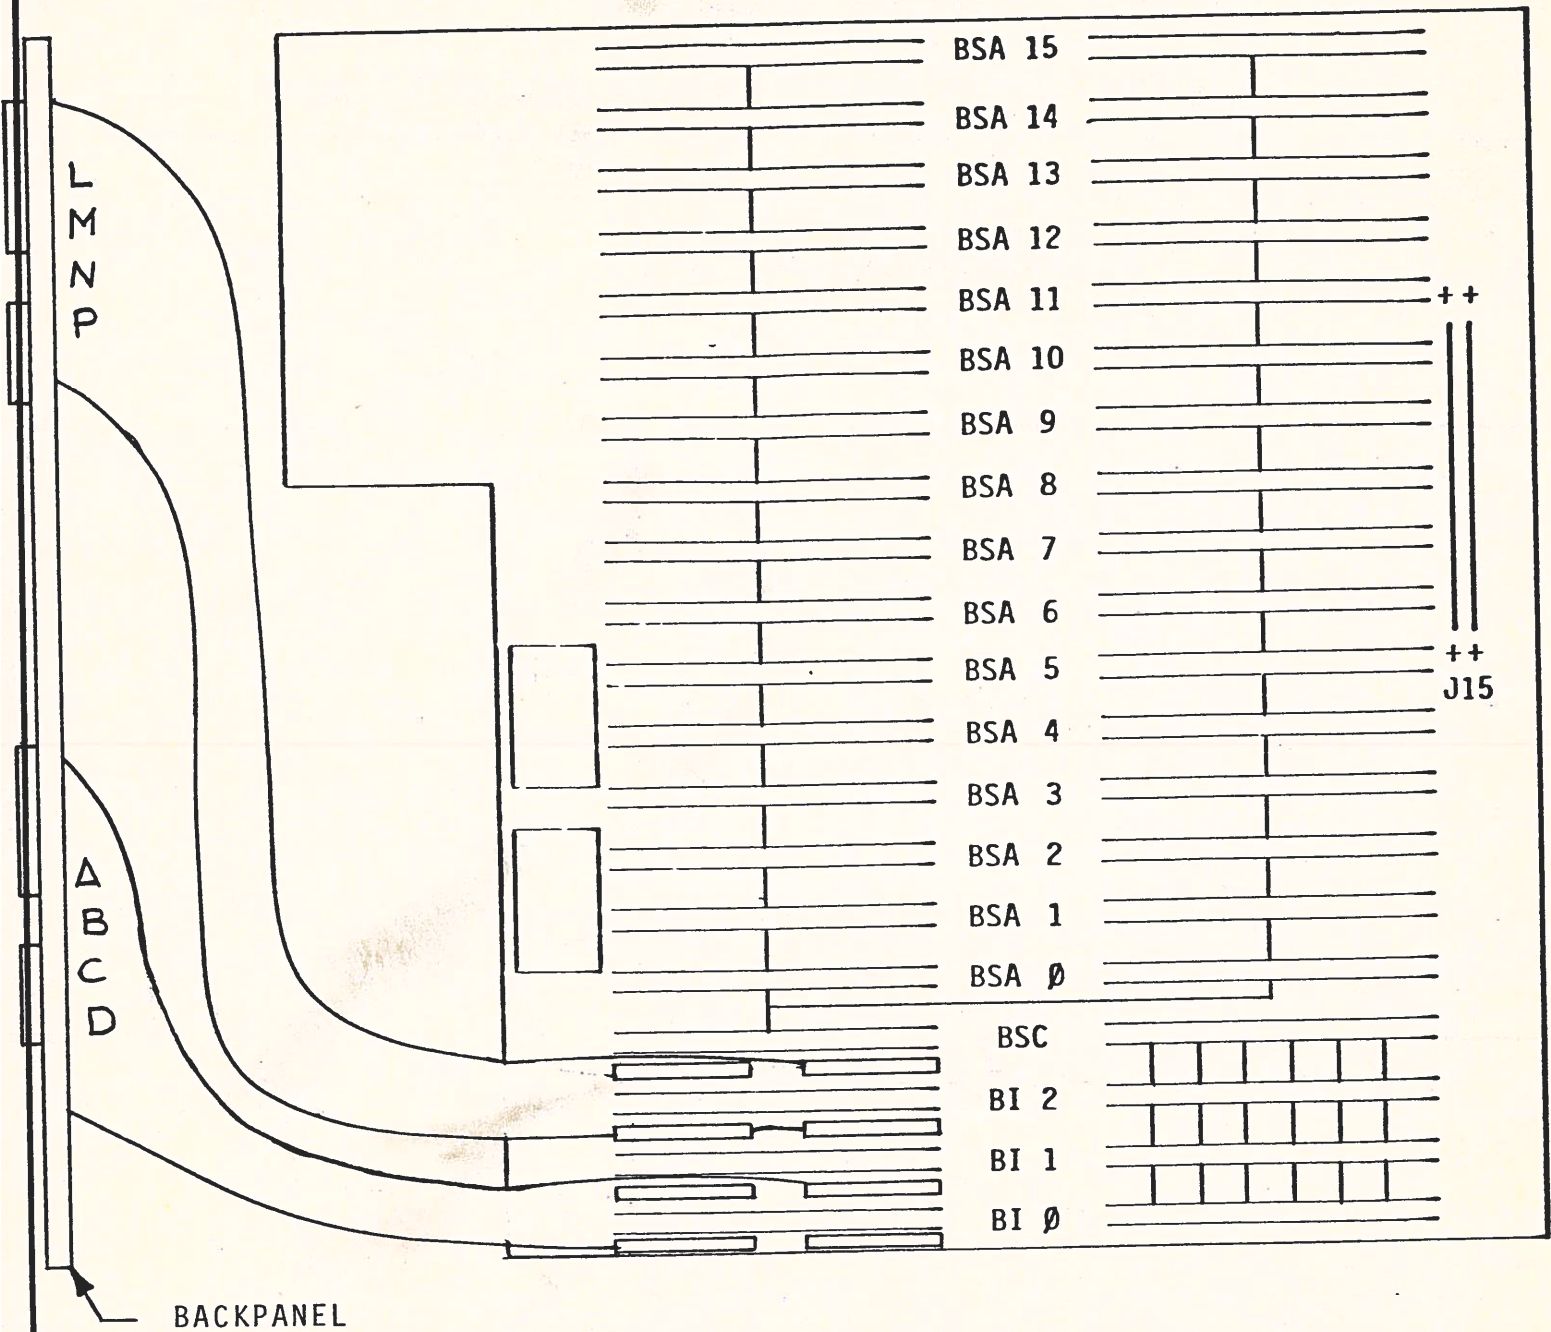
BS-101/102 15-3/4 INCH CHASSIS BACKPLANE (WIREWRAPE SIDE)
